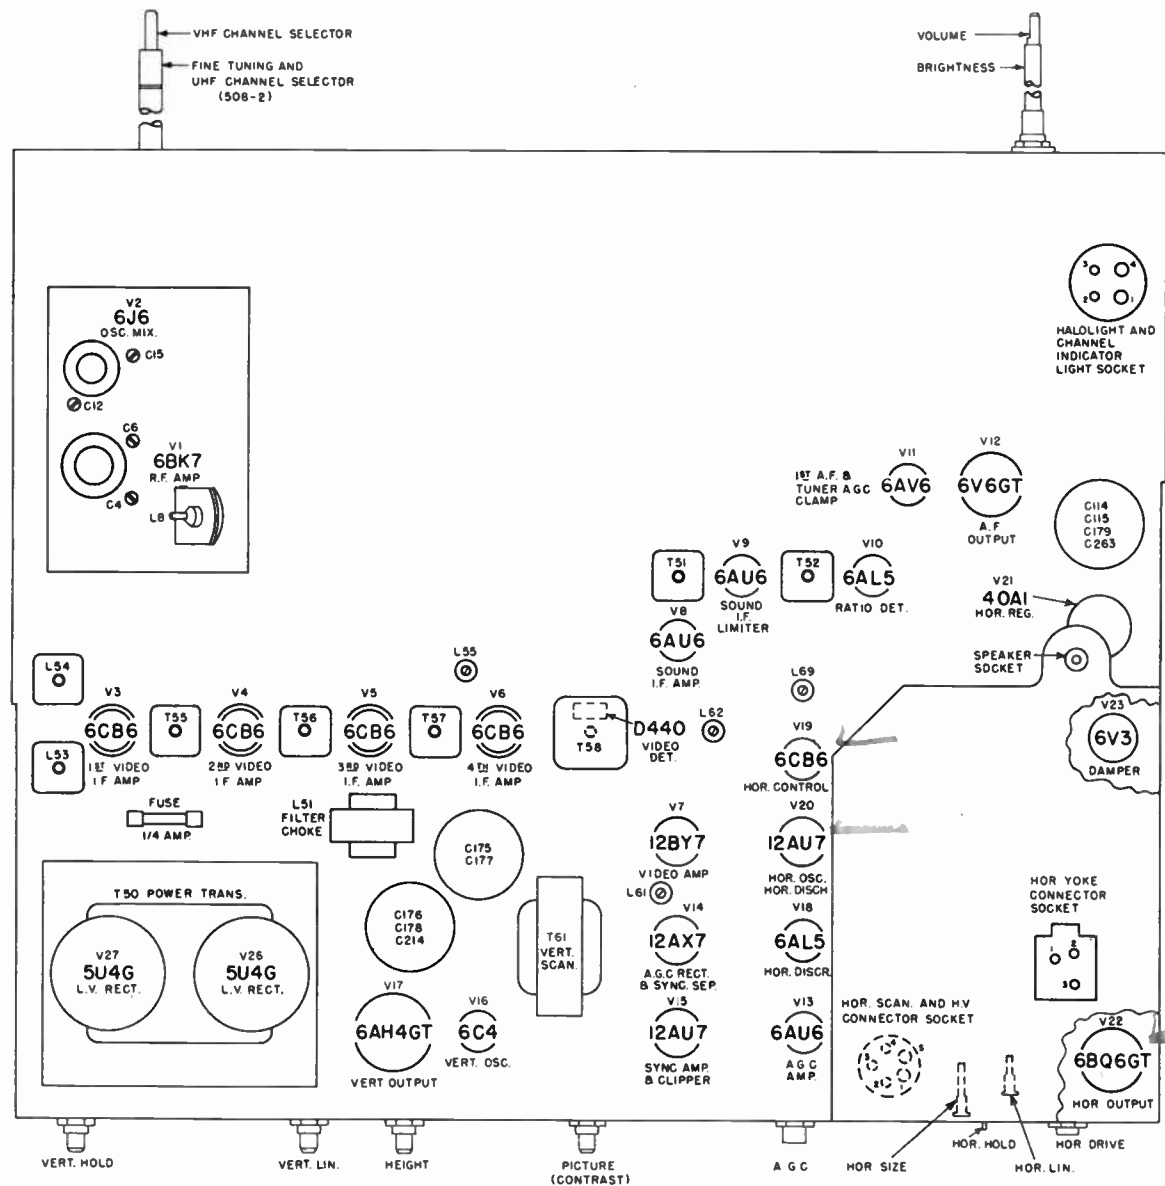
TOP LAYOUT FOR 1-508-1, 1-508-2 TV CHASSIS
